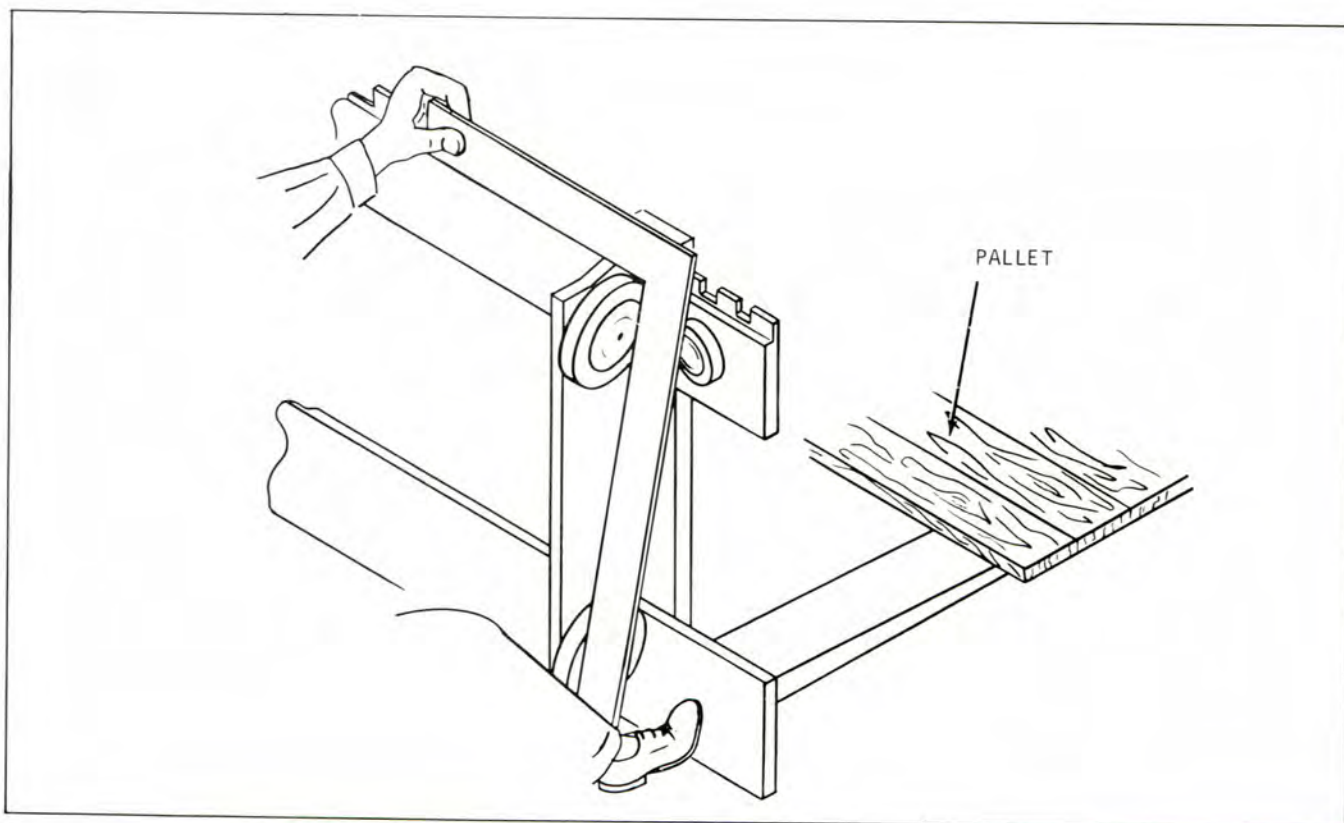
Squaring Carriage Rollers (Four Roller Carriage)
